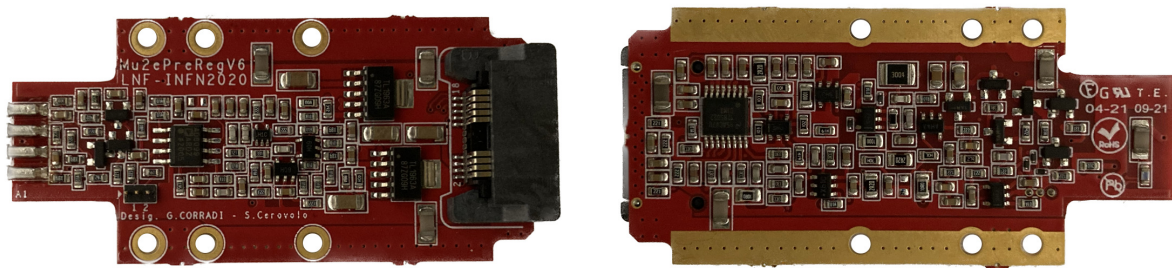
Top and bottom view of a Mu2e FEE board.
